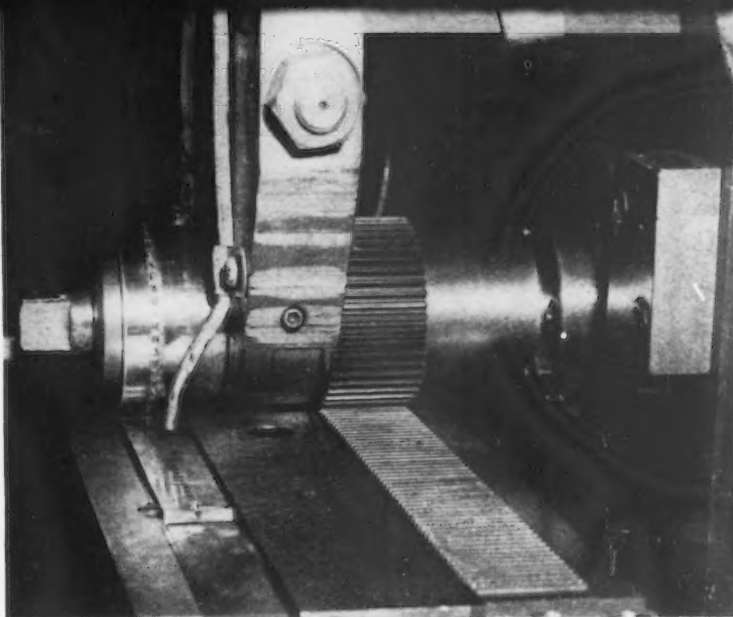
This Cincinnati milling machine setup is used for rolling raised numerals and characters on the rims of wheels clamped between flanges on the machine spindle. On the spindle is also a pinion that meshes with a rack that rotates the spindle as the table is oscillated. The rack is part of the fixture that holds a series of die blocks into each of which is engraved a recessed character or matrix that forms a corresponding character on the wheel.
